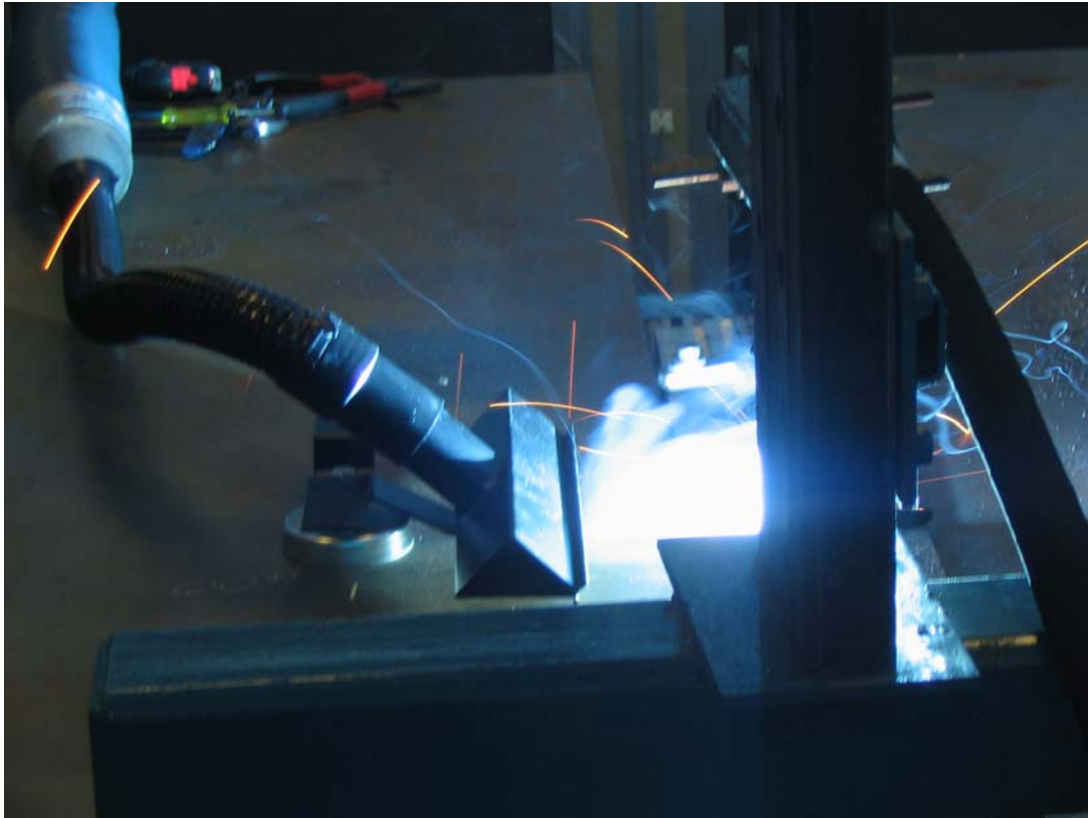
Still photograph of test 82; slot hood positioned 150 mm downstream from a 300 mm weld
